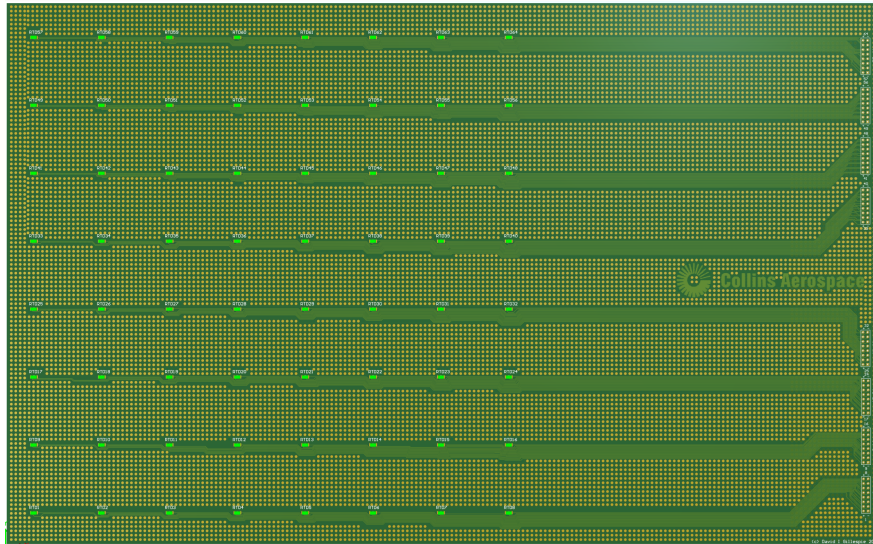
Printed Circuit Board (PCB) RTD array tool, displaying RTD probe locations and off sample connection headers to allow for vacuum bagging to tool.
